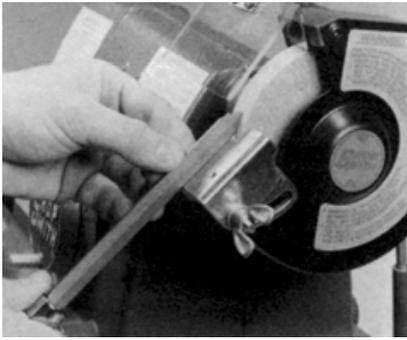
Lay the parting tool edge on the tool rest as shown.
